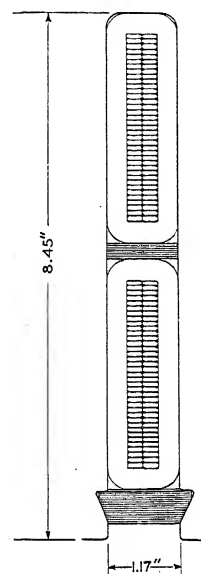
STATOR SLOT SECTION SHOWING CONDUCTOR ARRANGEMENT
